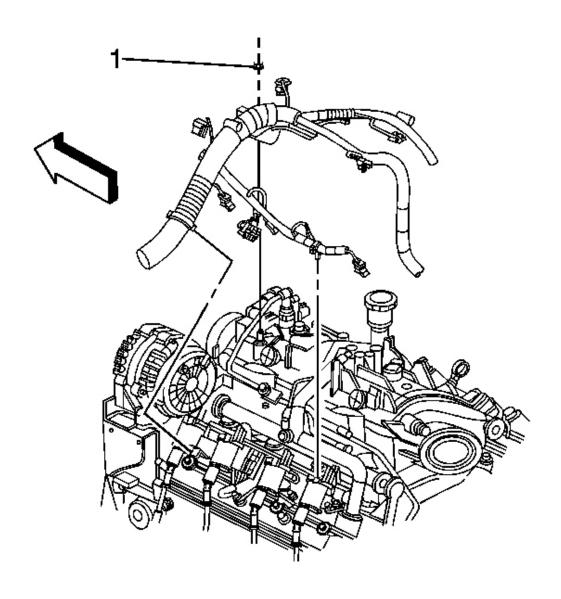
View Of Upper Engine Wire Harness Retainer Nut Courtesy of GENERAL MOTORS CORP.
